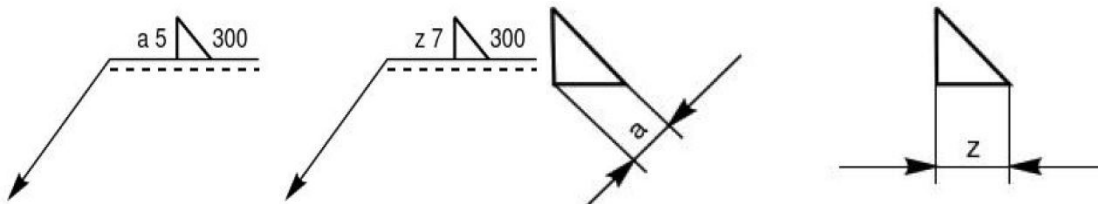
Dimensioning of fillet weld (Narayan, 2006, 161)
